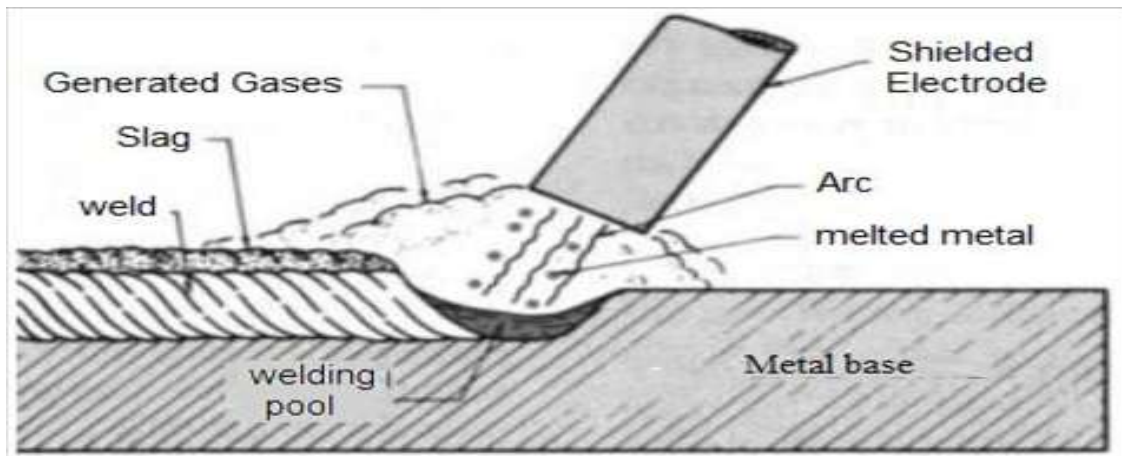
Schematic diagram of shielded metal arc welding.
